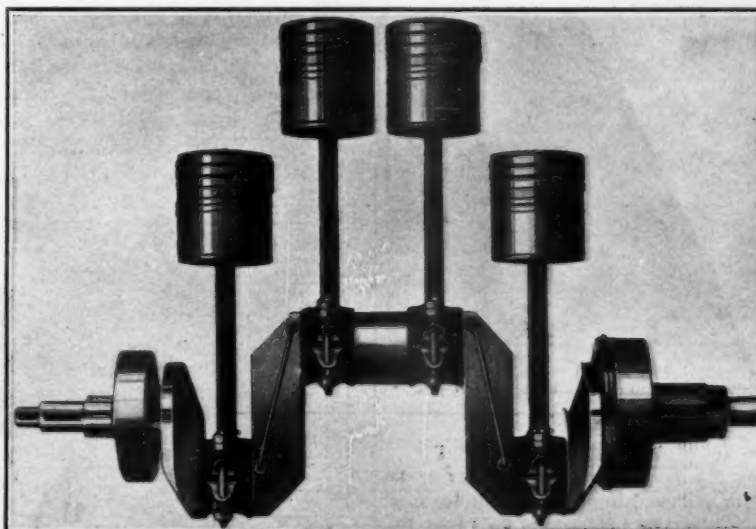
Crankshaft of substantial section with a very liberal annular type ball bearing at the transmission end, also piping system through which lubricating oil is passed to the crankpin journals.
